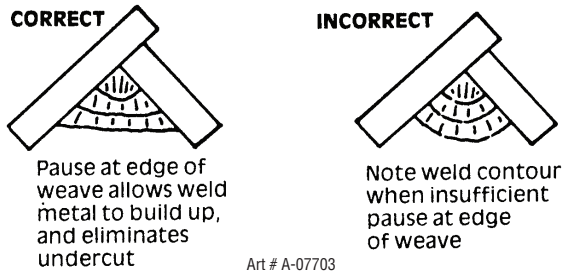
Examples of Vertical Fillet Welds
